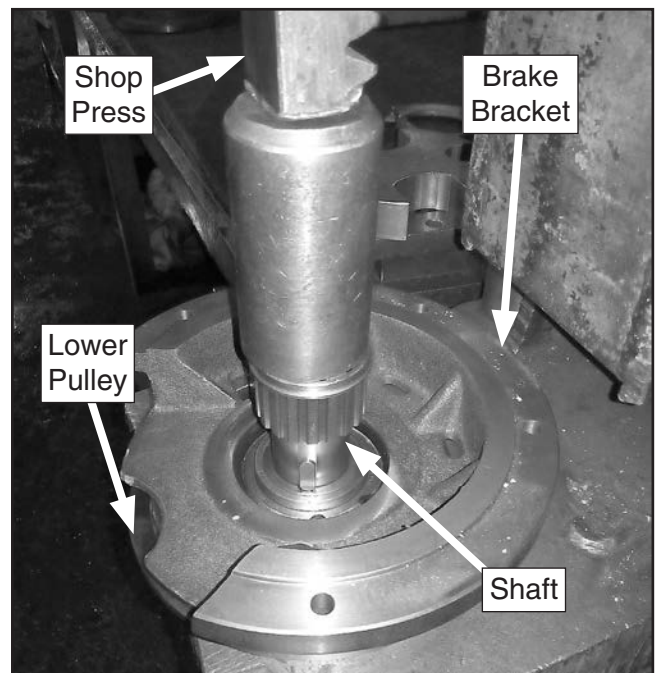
Brake bracket mounted on shop press for removal of shaft, bearing sleeve, and lower pulley.
